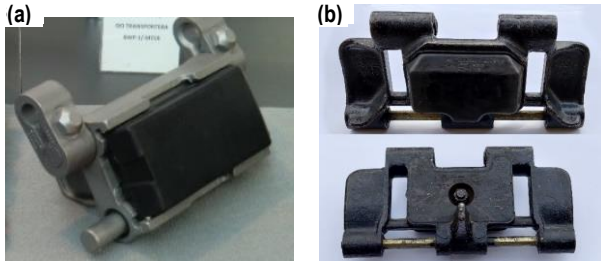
Link cover pads of the HSTV crawler tracks fixed: (a) pressed into guides and (b) screwed into the socket
